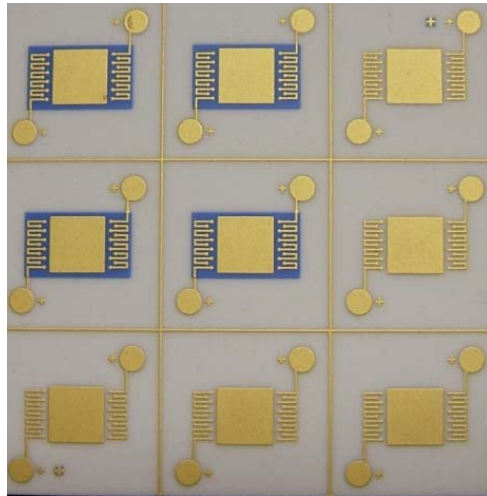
Wire bonding and Die Shear Test Vehicle
